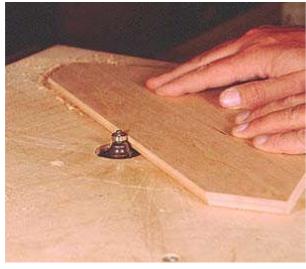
Rout a pattern in to the top edge. Make sure you make the top large enough that the pattern is beyond the top mold pieces.
